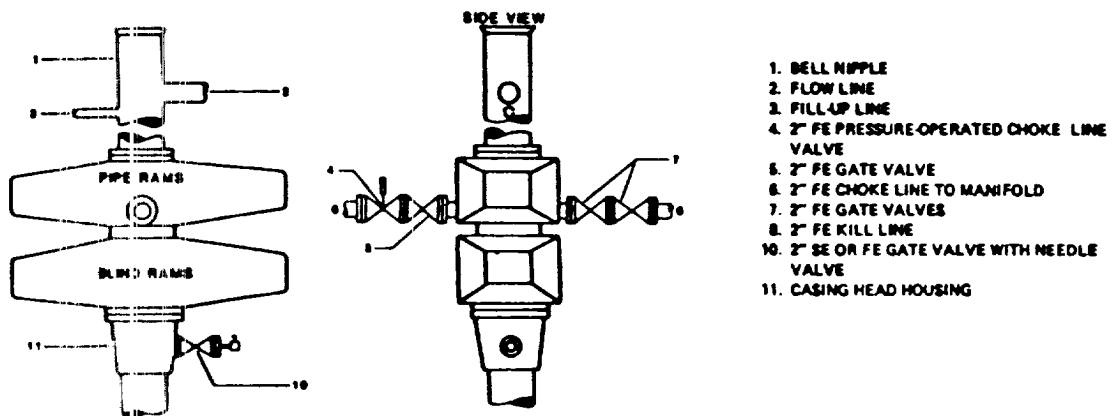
Standard Hydraulic Blowout Preventer Assembly (2 M or 3 M Working Pressure) Alternative 3 (without Drilling Spool)
